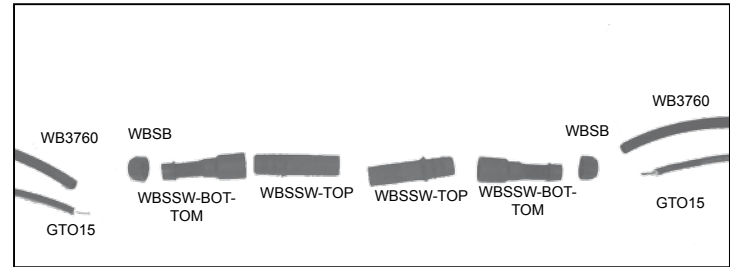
& 2 Exploded view of all necessary parts for a WETBITS Short Sleeve Wide (WBSSW) neon tube installation with straight connection electrodes
